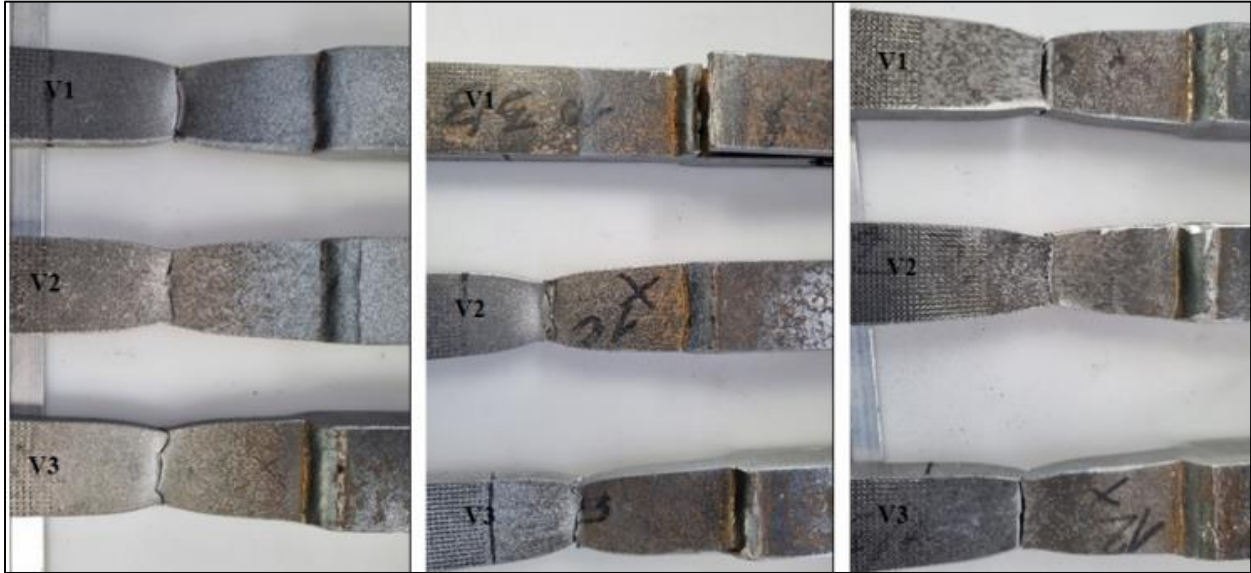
1 Views of specimen fractures acquired during tensile testing (Szusta et al., 2023)
